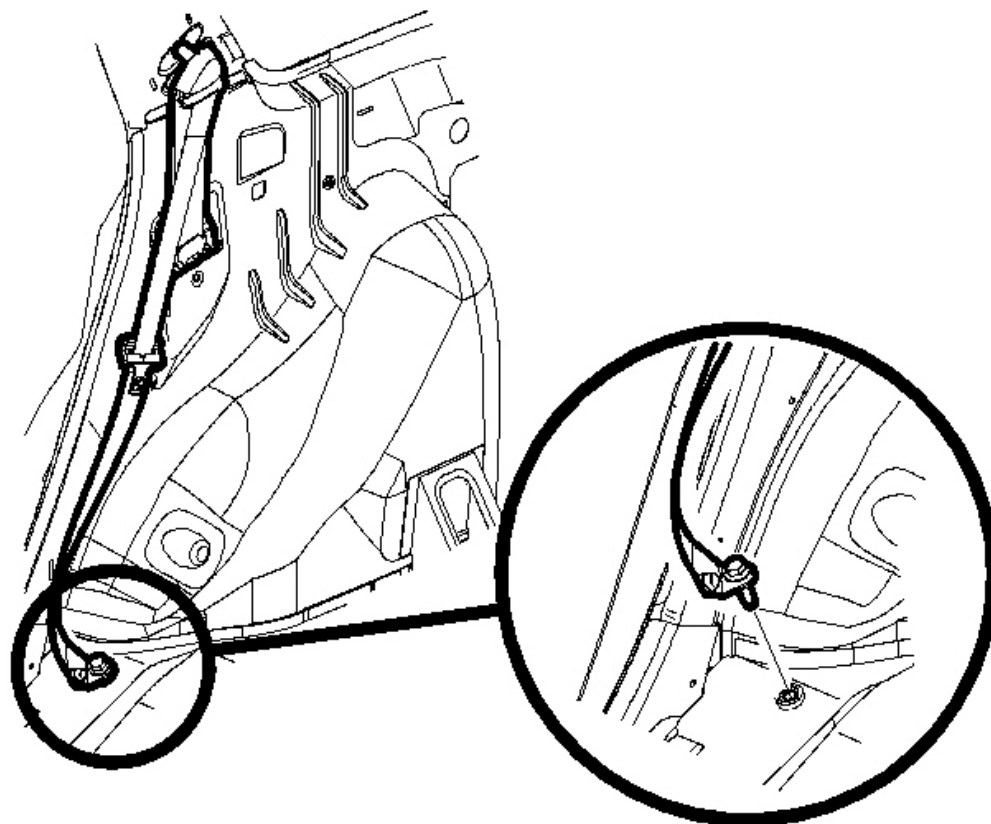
Upper Fastener Cover & Shoulder Belt
